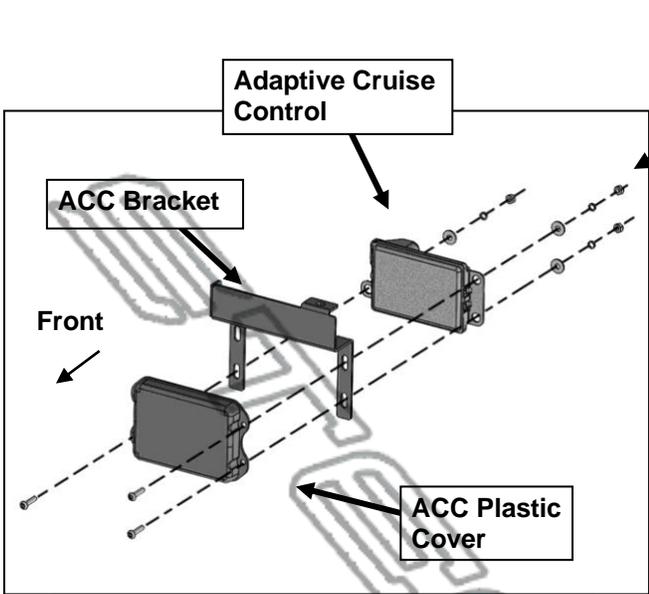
Insert Spacers between tabs on Bracket assembly and sides of frame
